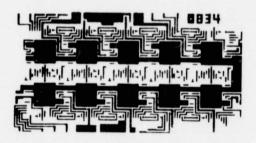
Tape carrier for Type 342 devices shown superimposed over matching bumped wafer
